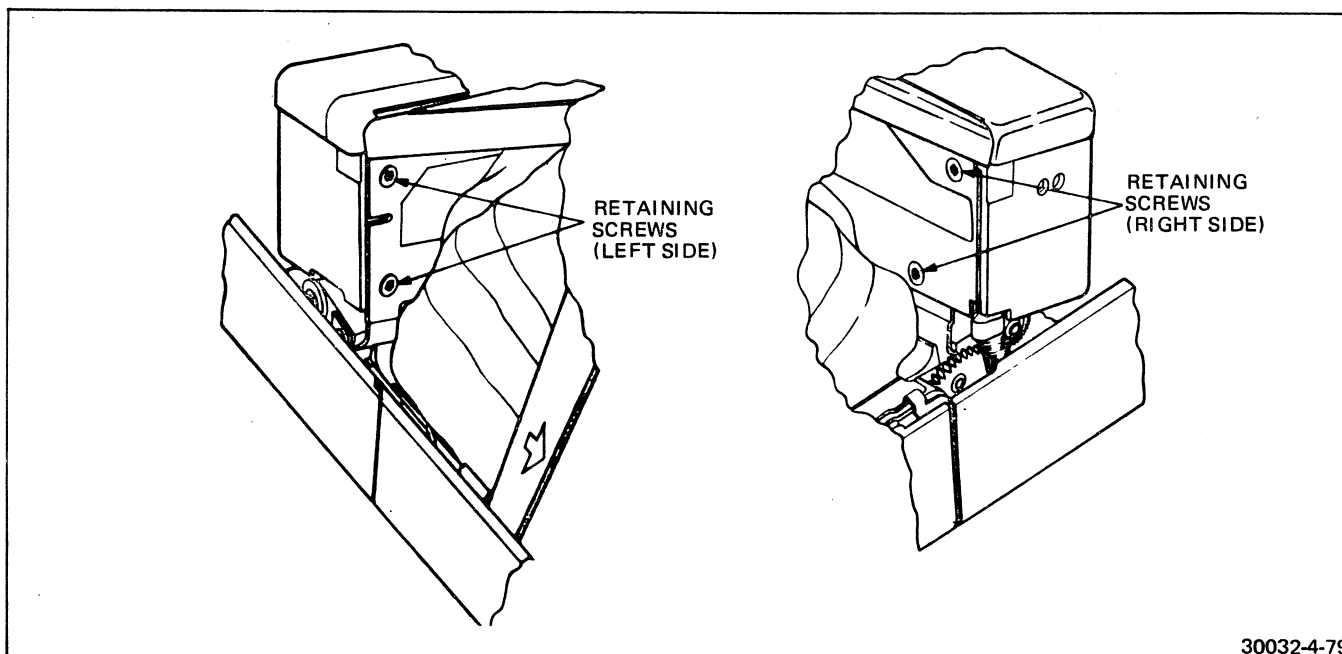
SHUTTER MOUNT RETAINING SCREWS
